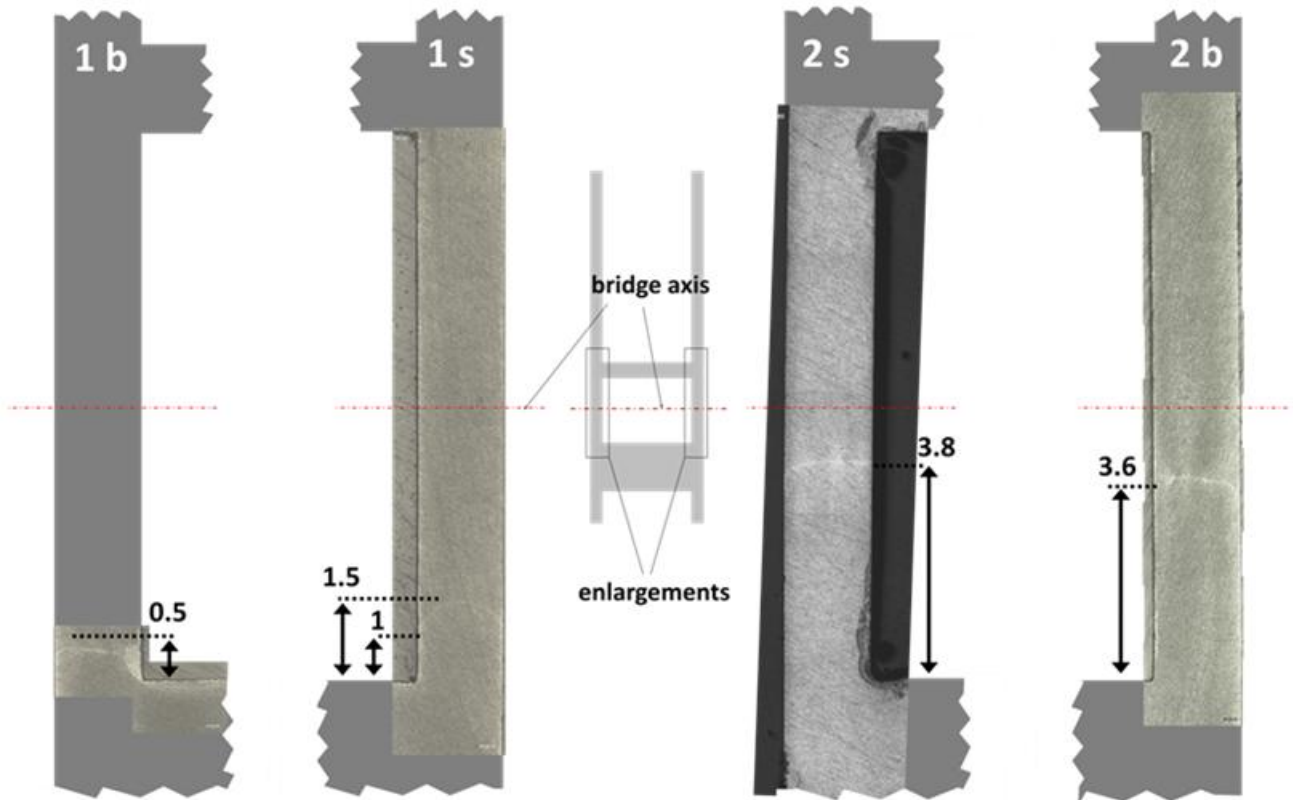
Section of the profiles from billet 3 showing the position of seam welds [mm]
